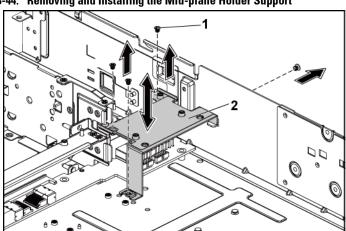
Removing and Installing the Mid-plane Holder Support
